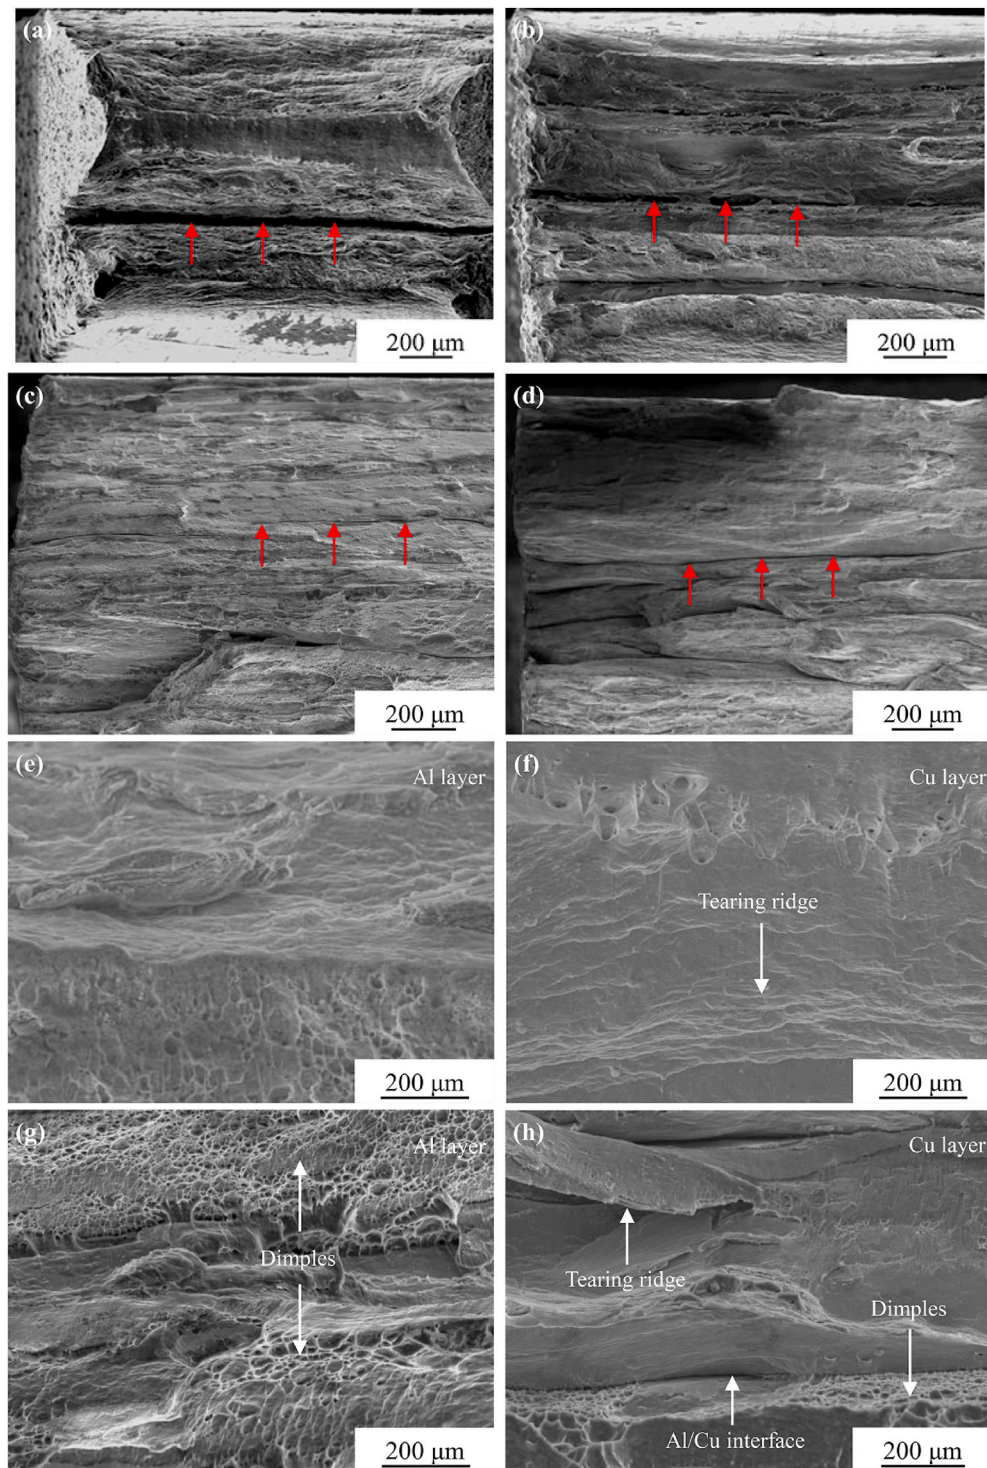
Fracture surfaces of the Al/Cu laminated composites with various ARB cycles: (a) 1, (b) 3, (c) 6, (d) 8. Fracture surfaces of Al layer (e) and Cu layer (f) with 1 ARB cycle. Fracture surfaces near Al layer (g) and Cu layer (h) with 8 ARB cycles. The red arrows indicate the newly-formed Al/Cu interface. (For interpretation of the references to colour in this figure legend, the reader is referred to the Web version of this article.)
